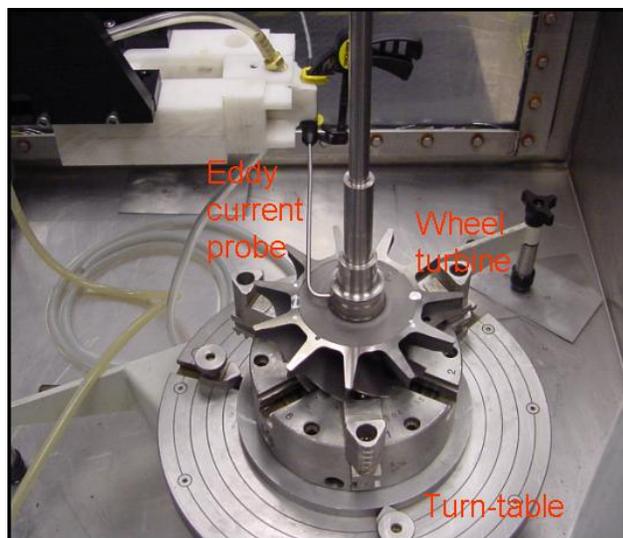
Shafted TiAl turbine wheel during NDE inspection.
